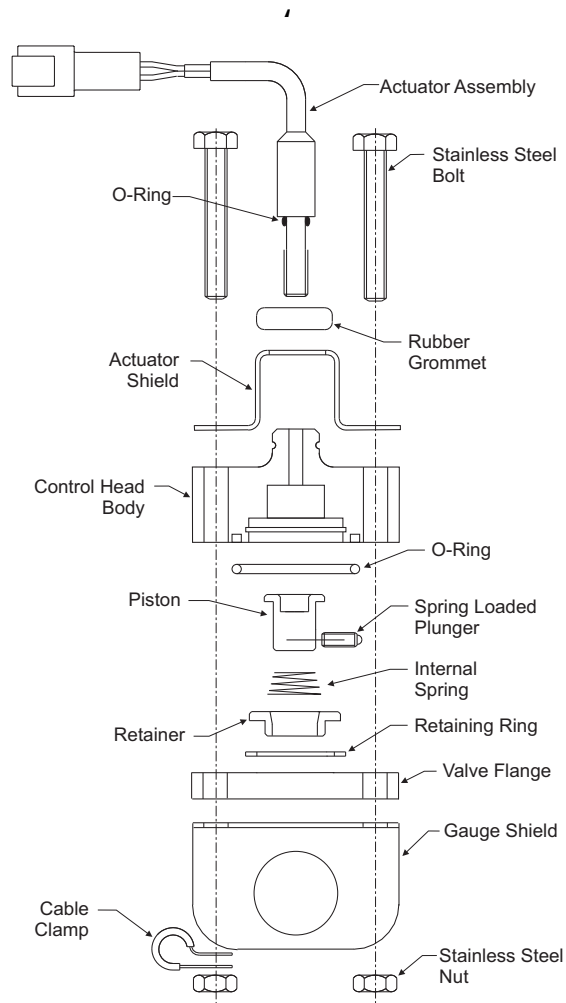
Exploded View of Electric Operated Control Head and Control Head Body
